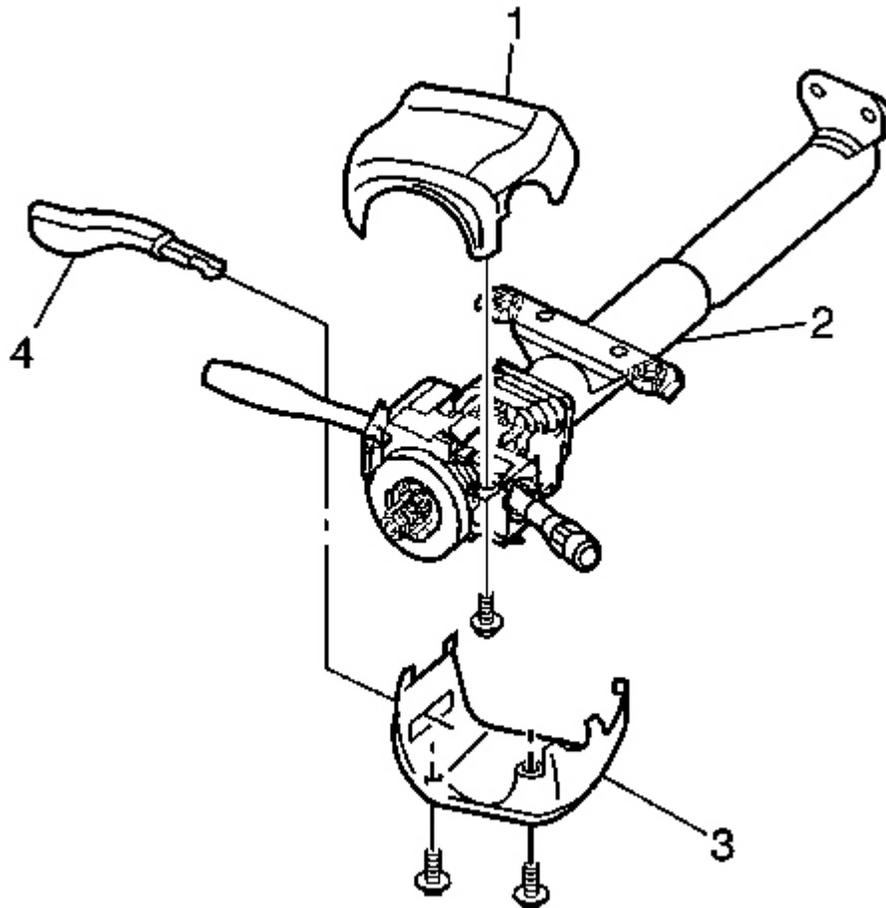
Driver Knee Bolster Trim Panel At Steering Column Covers
